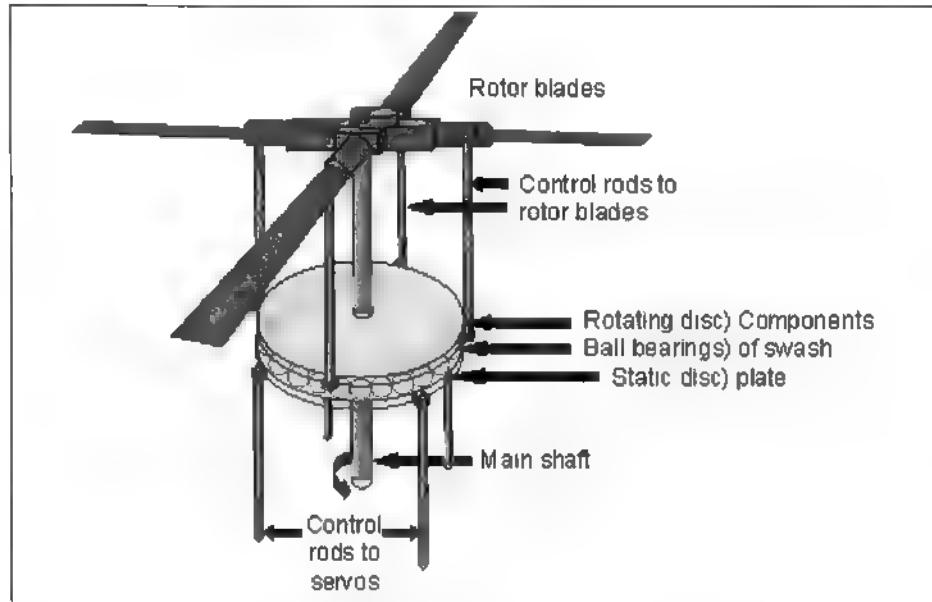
The swash plate with ball bearings fitted to a model helicopter. Each control rod requires a rod end (see Figure 8 on Page 59) fitted to its ends.
